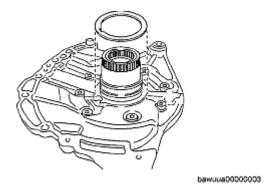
Identifying O-Ring Of Oil Pump Courtesy of MAZDA MOTORS CORP.
